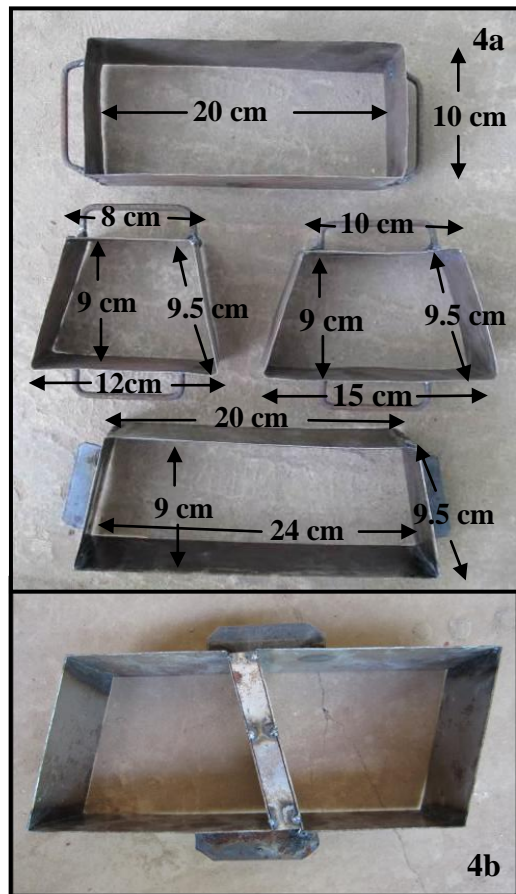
Mold dimensions (All have a thickness of 6 cm)
